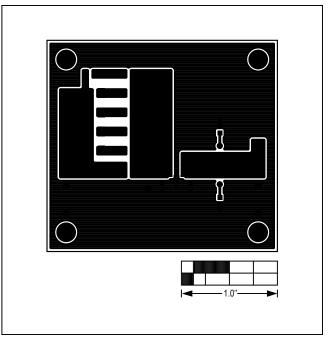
MAX14626 EV Kit PCB Layout—Component Side
